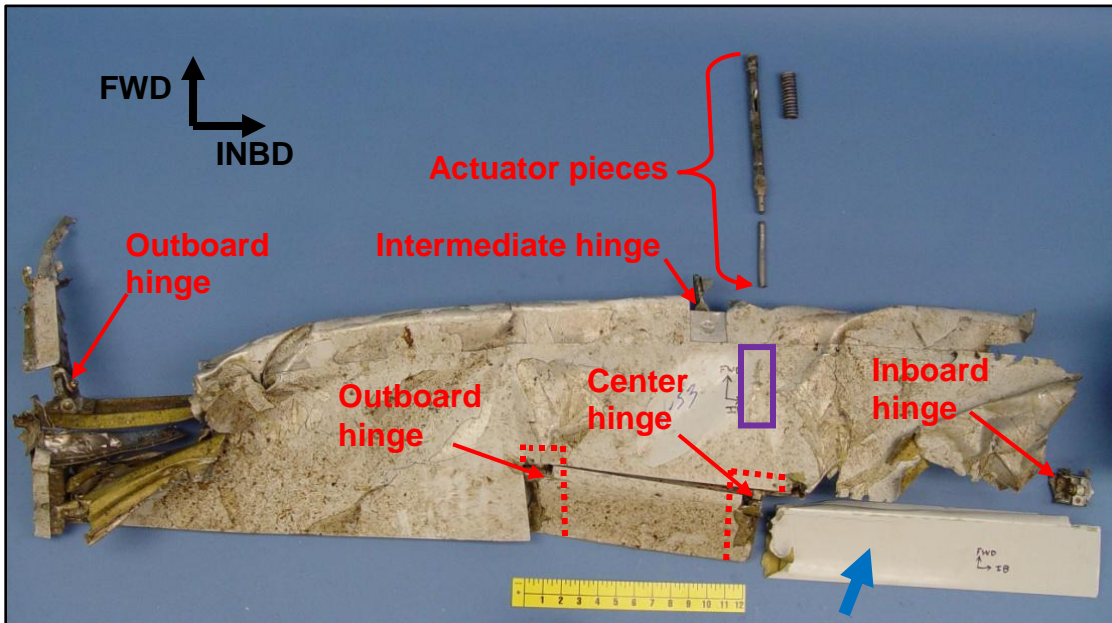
The left elevator, trim tab pieces and actuator pieces received for examination.
